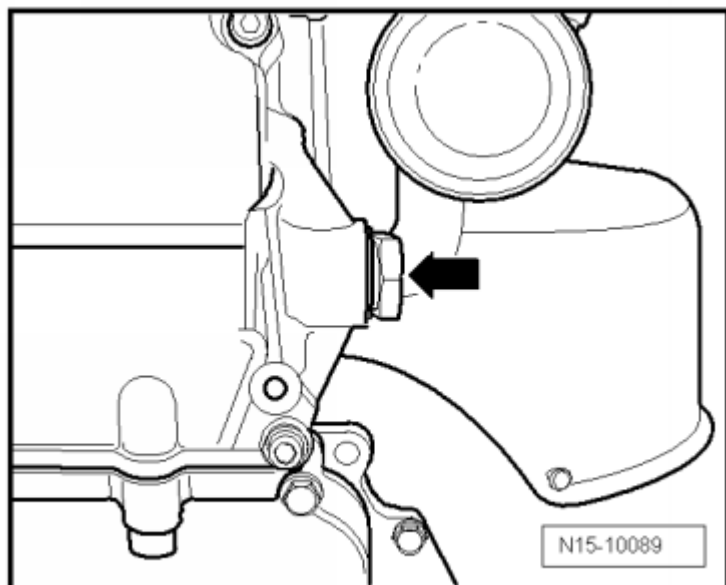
Chain Tensioner Bolt Camshaft Roller Chain
